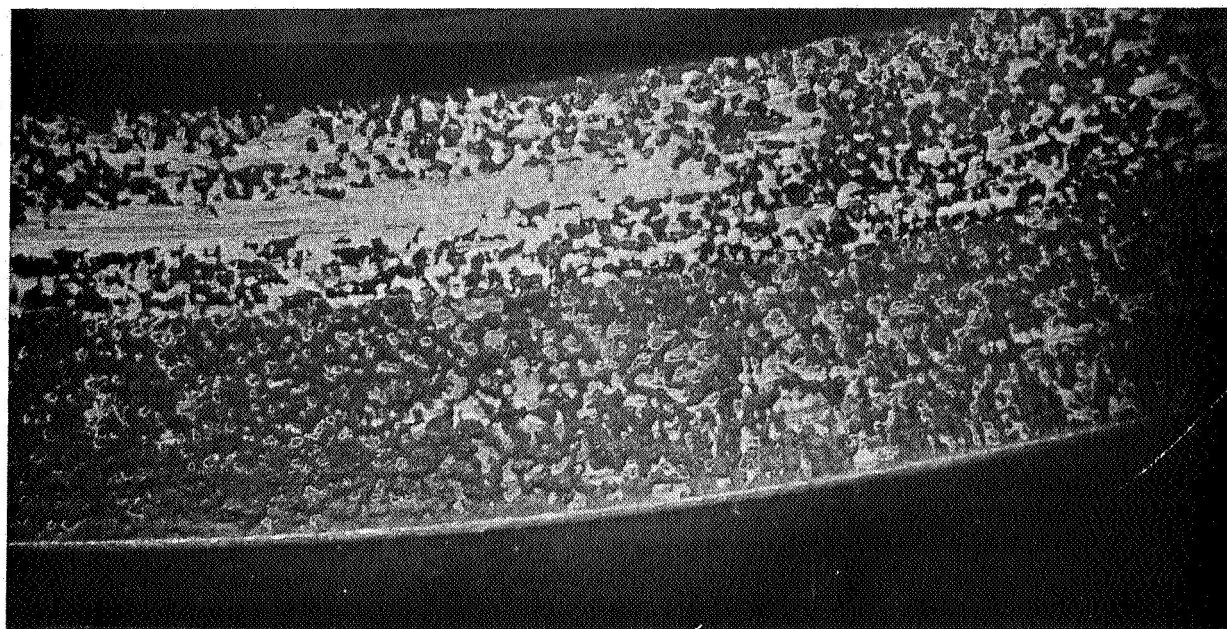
BEARING S/N 74. 10X MAGNIFICATION OF INNER RACE SHOULDER SHOWING EXTENT OF CHEMICAL CORROSION.
